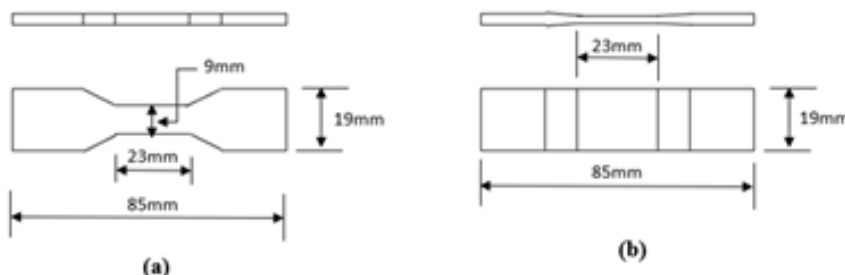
Schematic drawing of (a) Parallel cut and (b) Perpendicular cut of Dumbbell-shaped specimen
